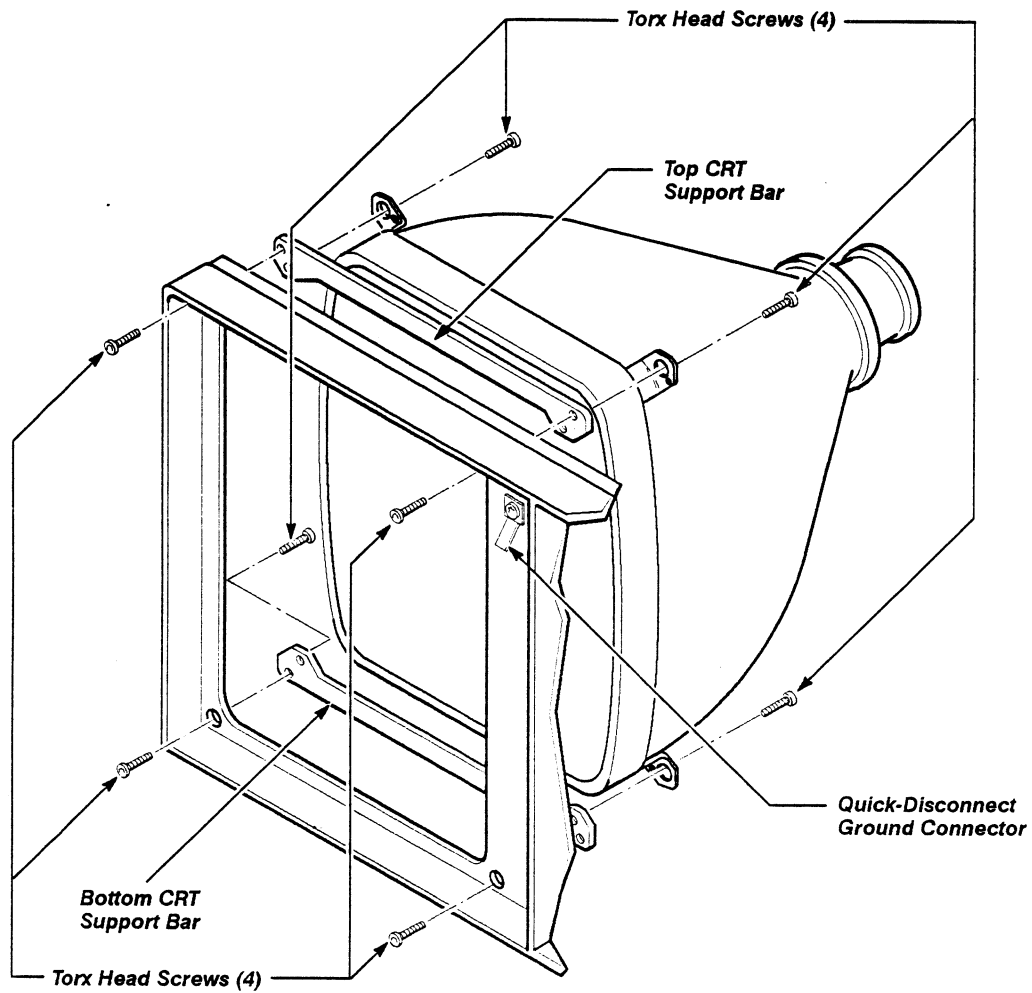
Removing/Replacing the CRT Torx Head Screws
